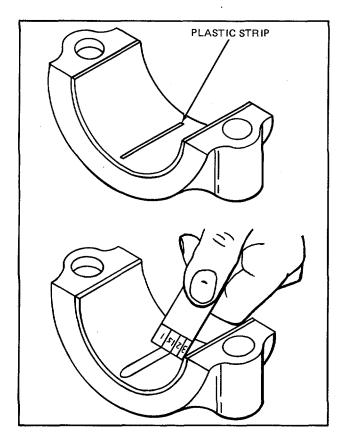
Using Plastic Strip to Measure Bearing-to-Crankshaft Clearance
